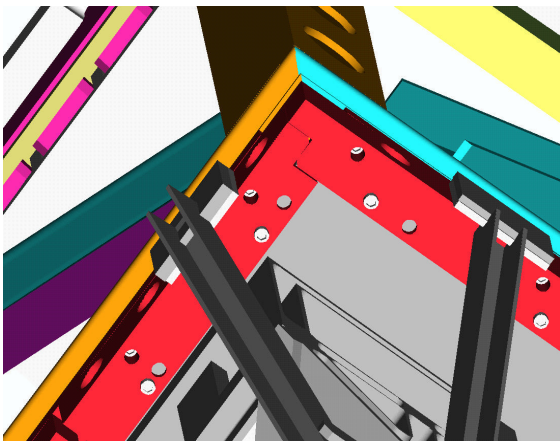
Cap head screws connecting L shaped piece of the implementation ring to the implementation ring spacer.
